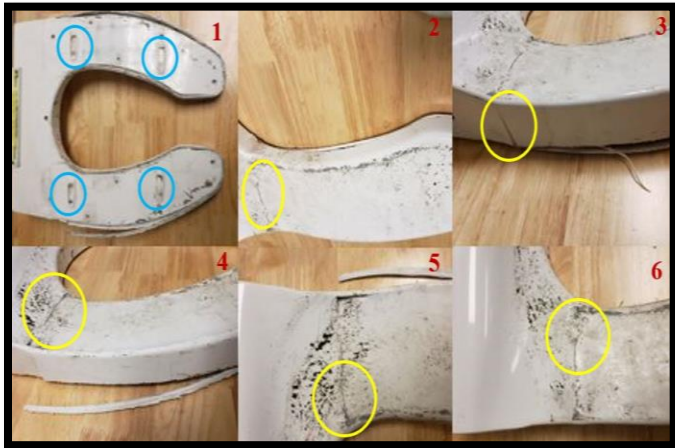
CRACK AND BREAKING POINTS IN THE SEAT #1
